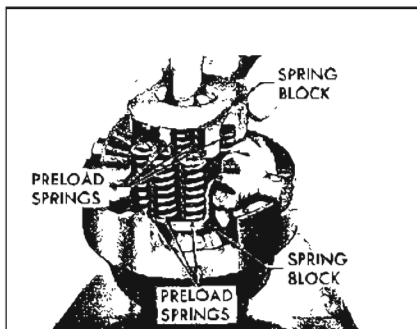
Installing Preload Springs & Second Thrust Block Into Differential Case
